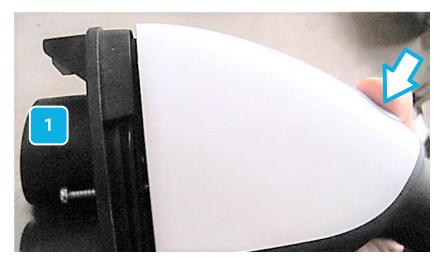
Huber + Suhner charging plug connector face CCS1, cover
